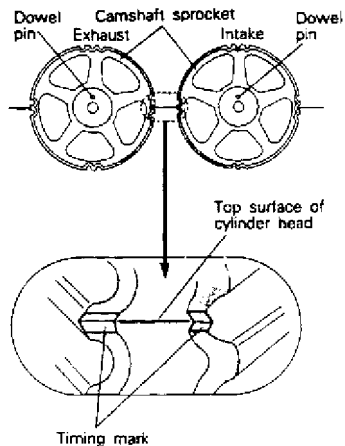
Camshaft Sprocket Timing Marks Alignment
